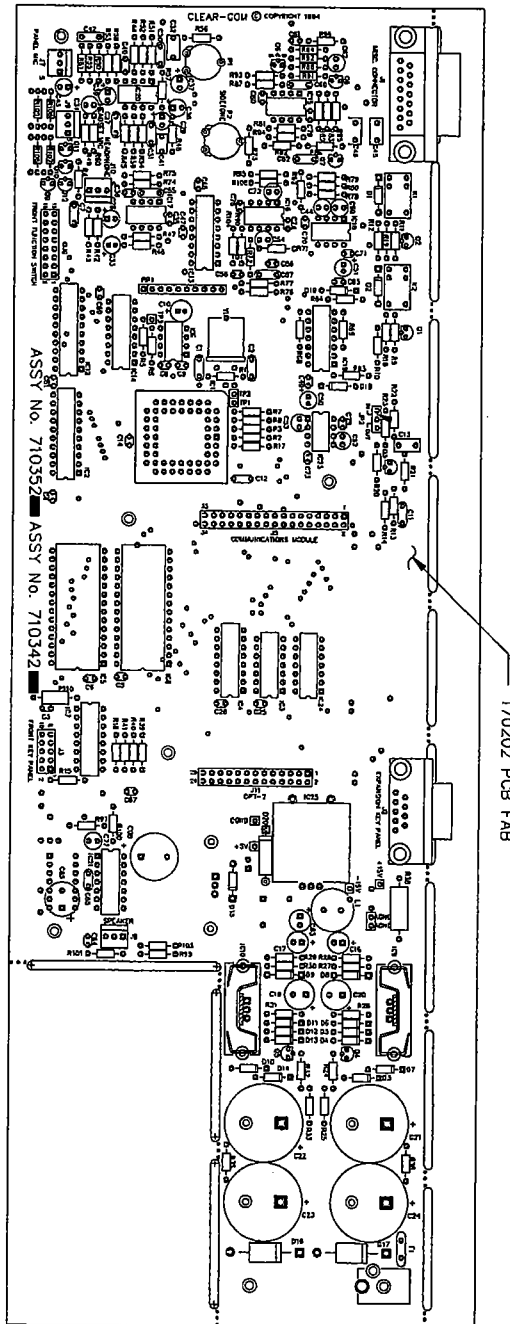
Assembly Drawing—ICS-92/92T/ICS-52/52T Main PCB Rev. E
